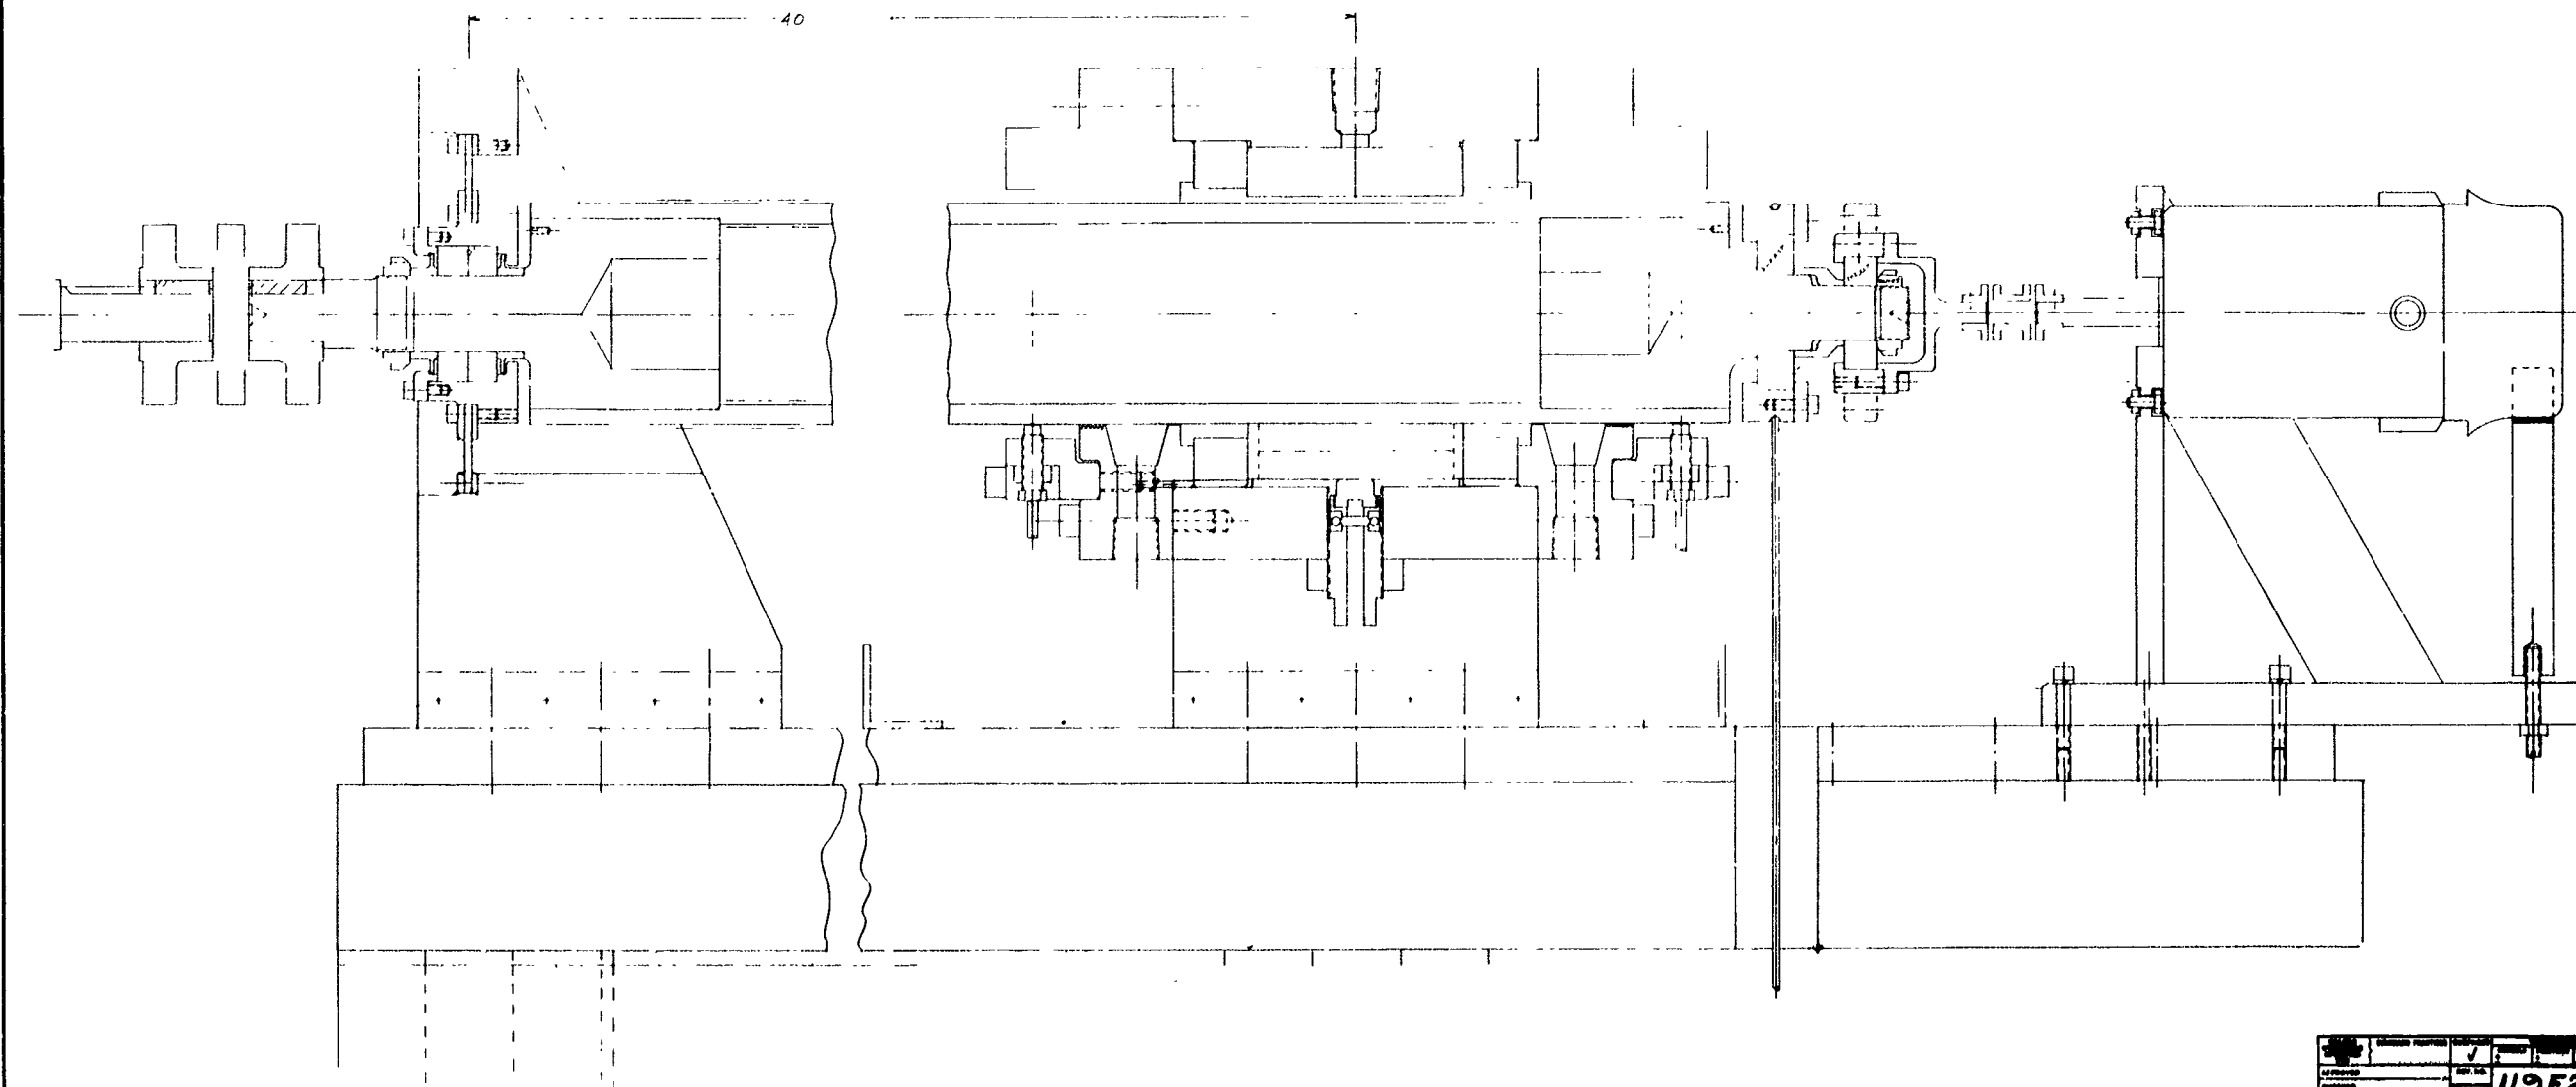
Arrangement of Dynamic Load Bearing Apparatus Major Components
